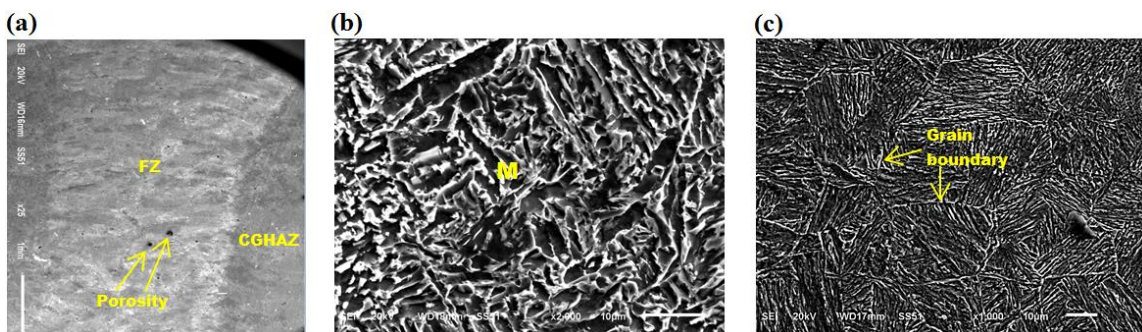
(a) The weld cross section profile of welded S6 joint in keyhole laser butt welding of S700 HSLA steel, (b) the microstructure in the fusion zone (FZ) and (c) the microstructure in the coarse grained heat affected zone (CGHAZ) in this weld cross section profile of S6. M: Martensite
